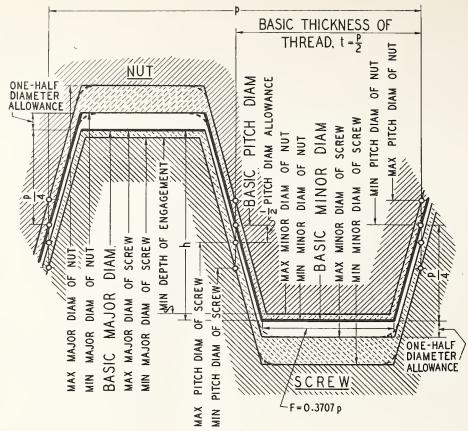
Illustration of allowances, tolerances, and crest clearances, general purpose Acme threads.
